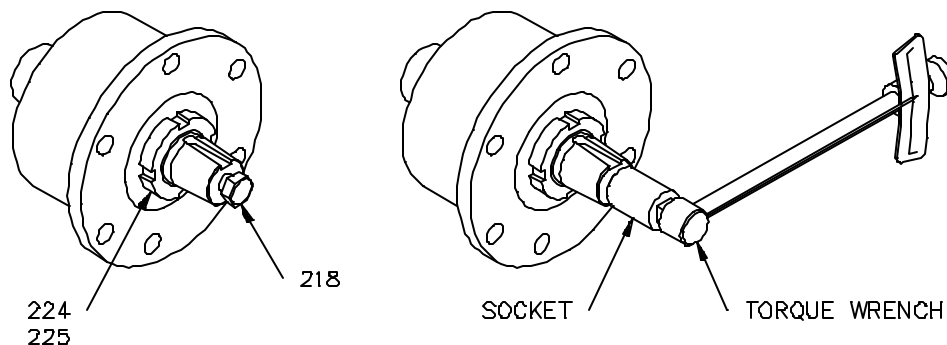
Spiral Bevel Pinion Cartridge Assembly [223]
